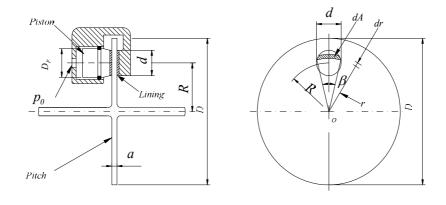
Structural drawing of the disc brake caliper Fig. 2 C
